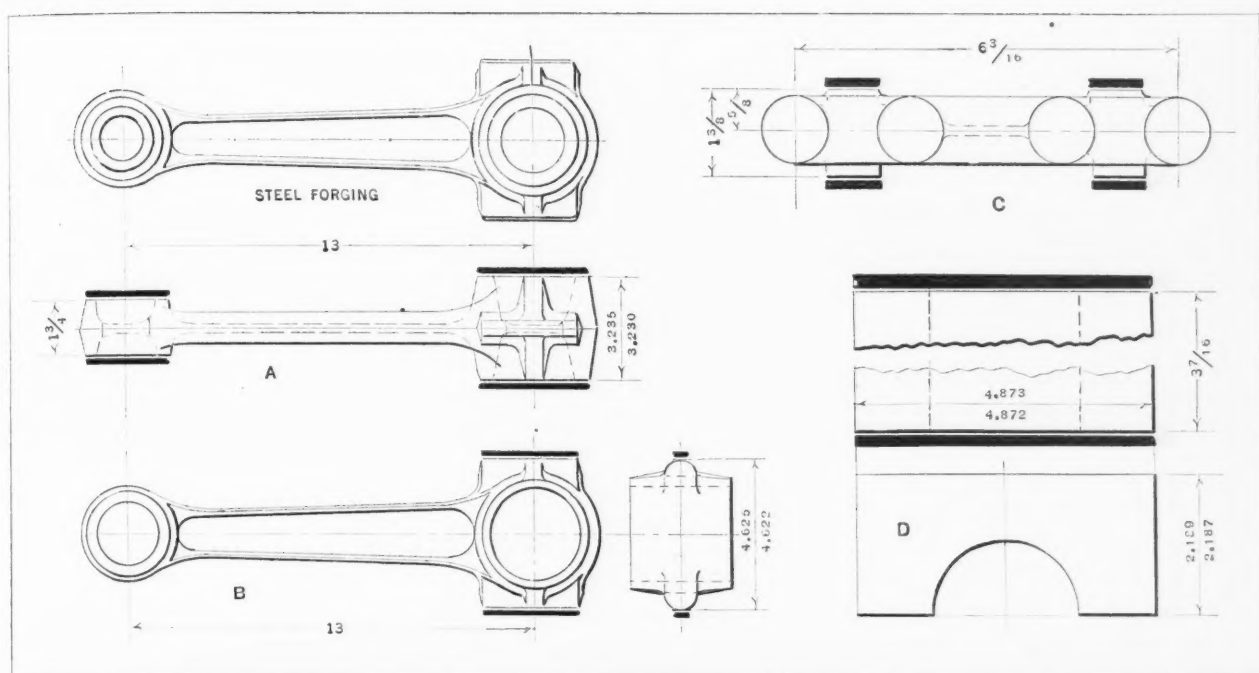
Tractor Engine Parts Machined in Fixtures Shown in the Accompanying Illustrations
